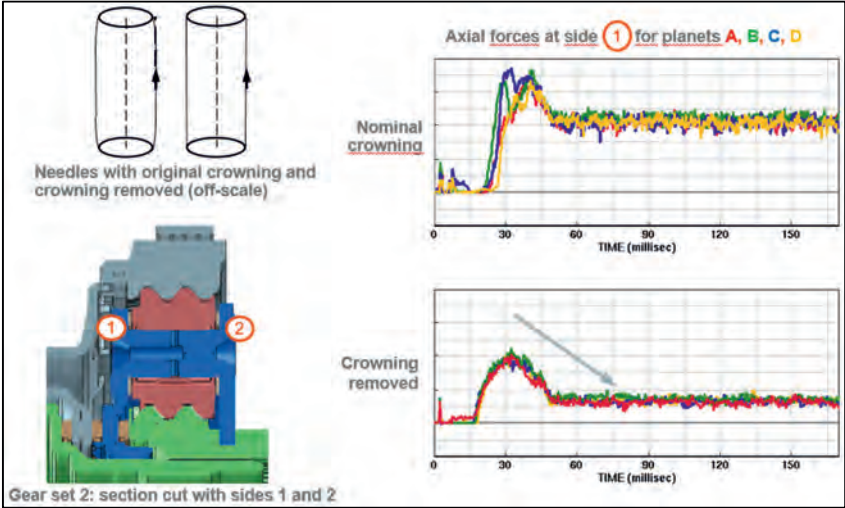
Axial disc forces for gear set 2 with nominal needle crowning and crowning removed
